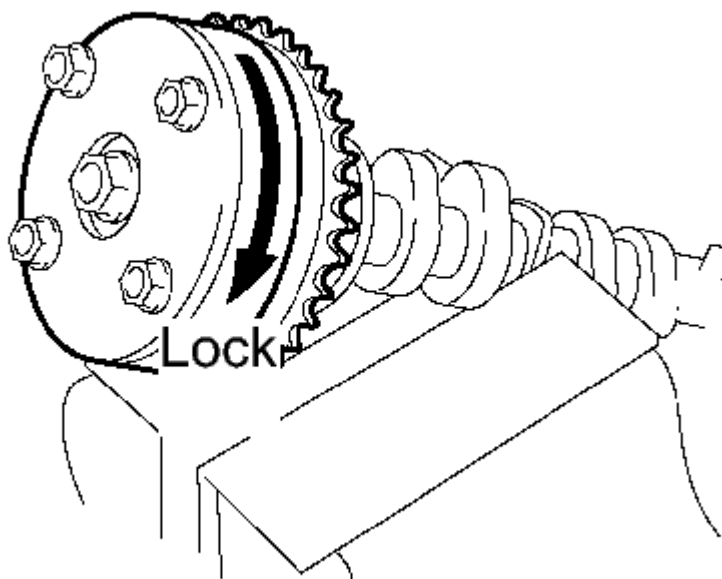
Checking That Camshaft Timing Gear Can Move To Retard Angle Side (The Right Direction)
